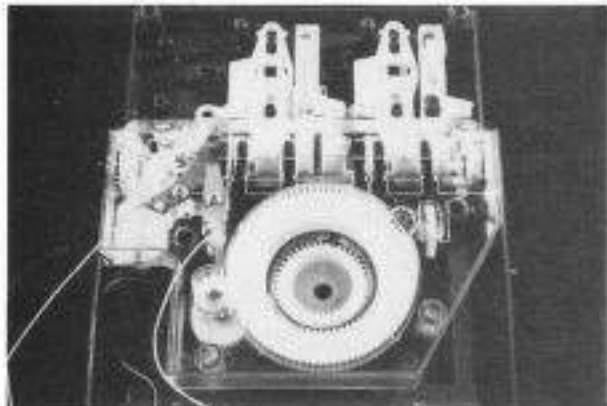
Inside view of the main gear box located in the base. That little motor moves everything. The planetary gear arrangement is visible in center.
